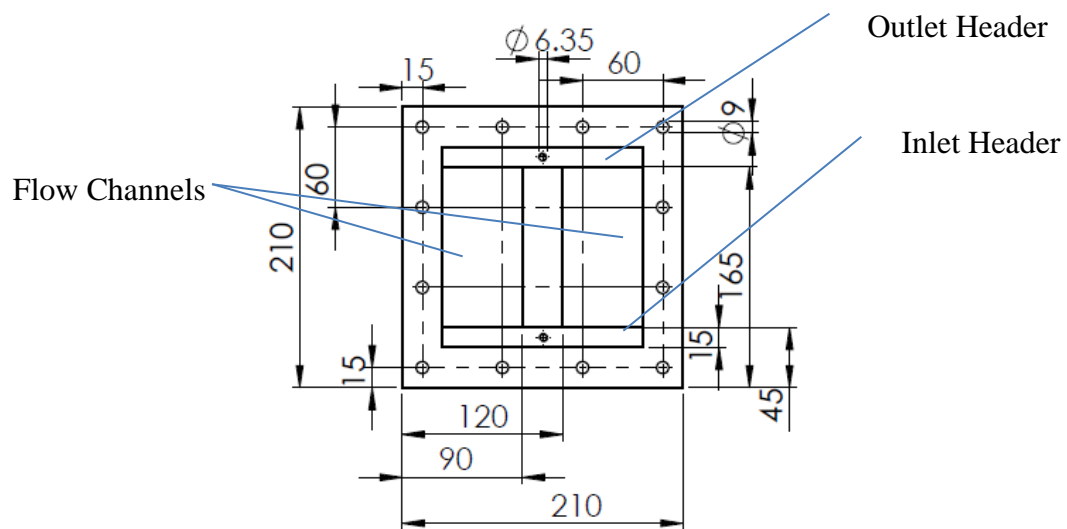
A detailed solidworks sketch for the module with its dimensions in mm
